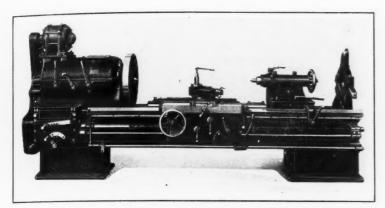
"Cataract" Lathe with Enclosed Headstock and V-belt Drive
